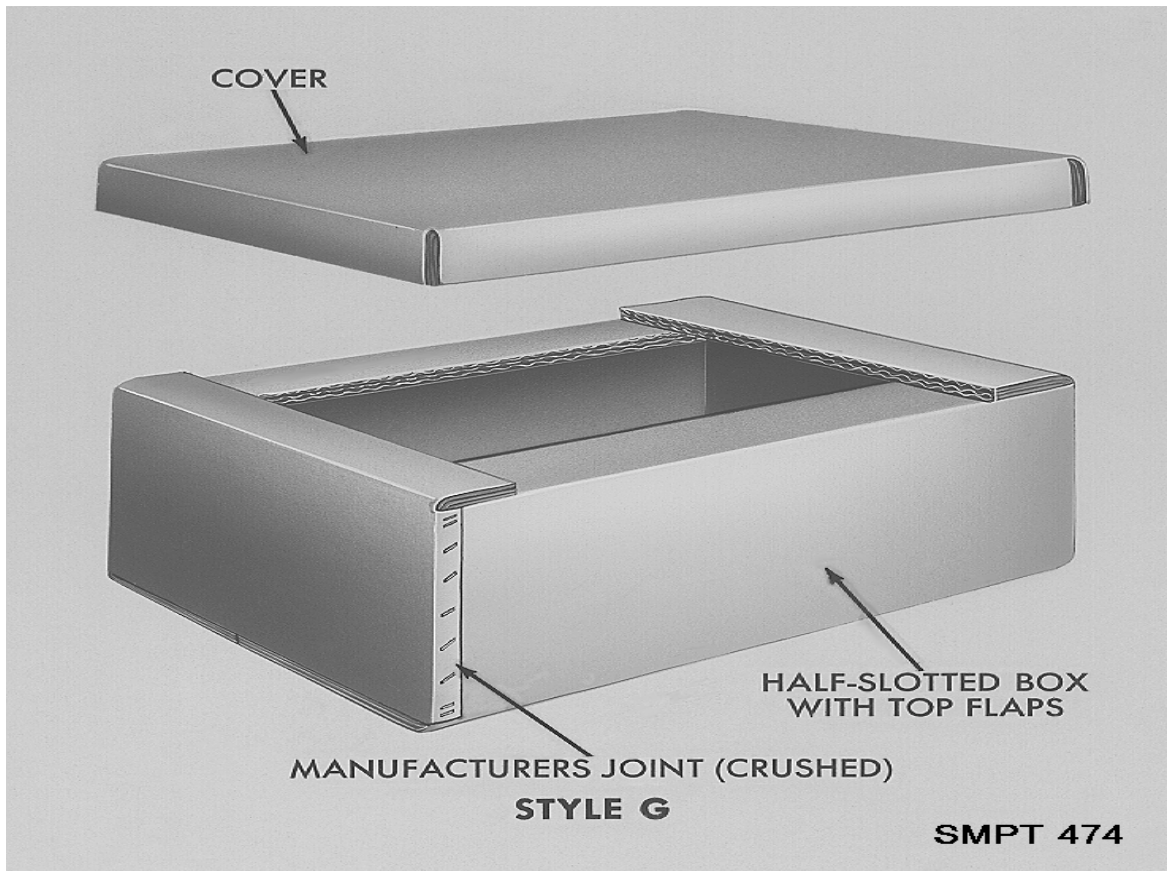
Style G triple-wall corrugated fiberboard box.
